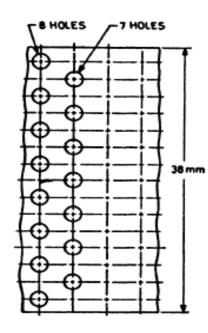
STAGGERING OF 7/8 HOLES IN A FILLET
